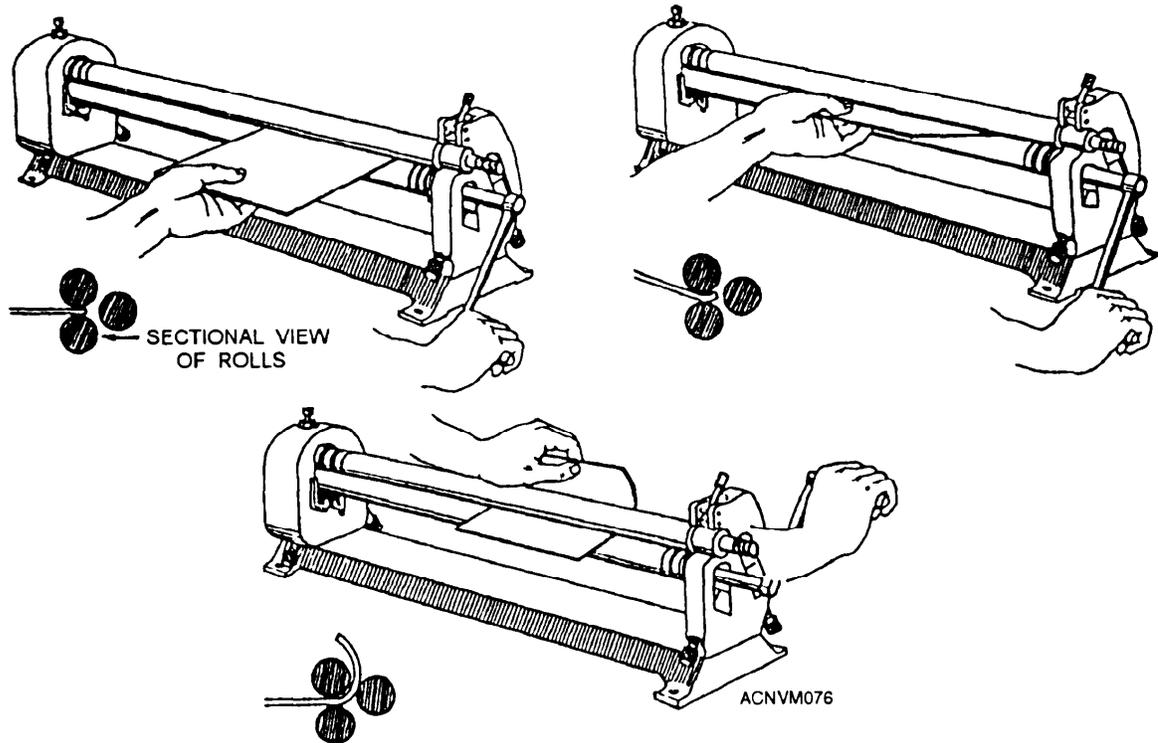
Forming a cylinder on a slip-roll forming machine.
